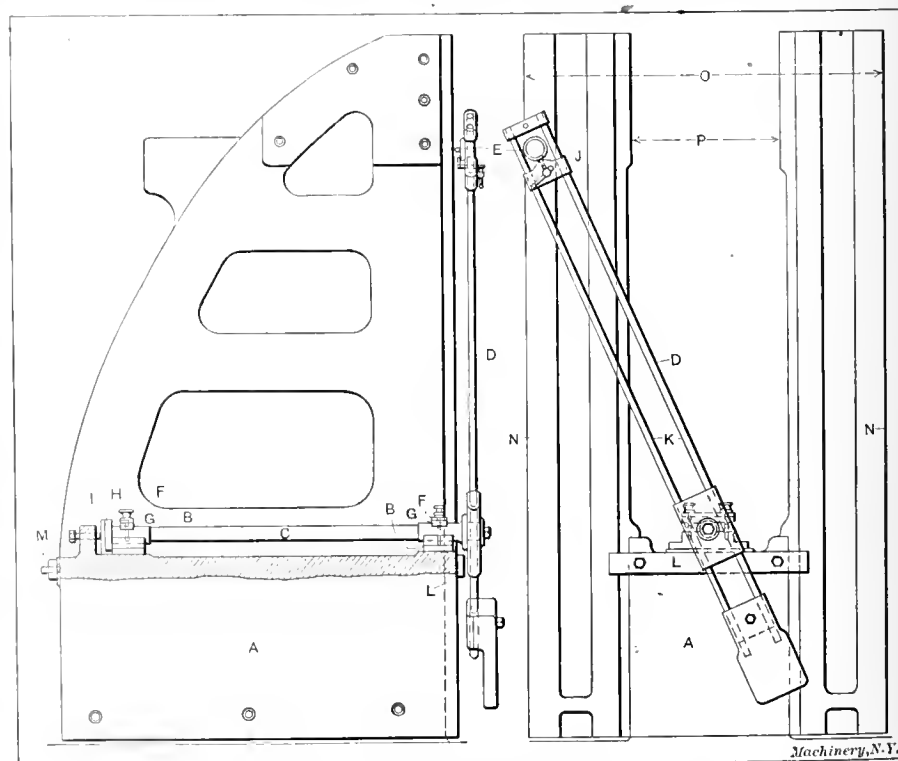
Special Fixture used for Testing Alignment of Housing Faces and provided with Sweep for Carrying Starrett Indicator
